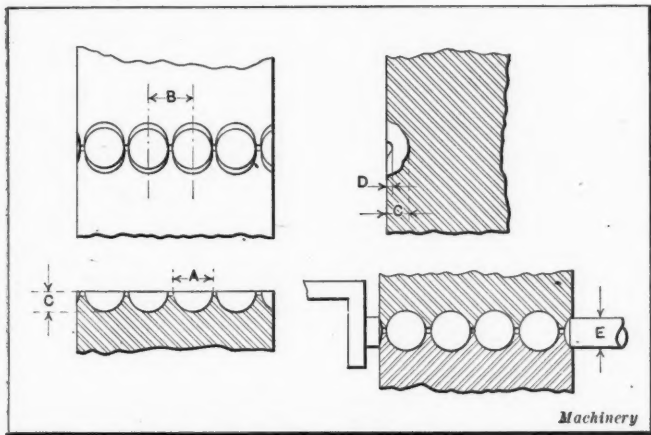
Type of Die used for hot-forging Ball Blanks for Balls exceeding  $\frac{5}{8}$  Inch Diameter
